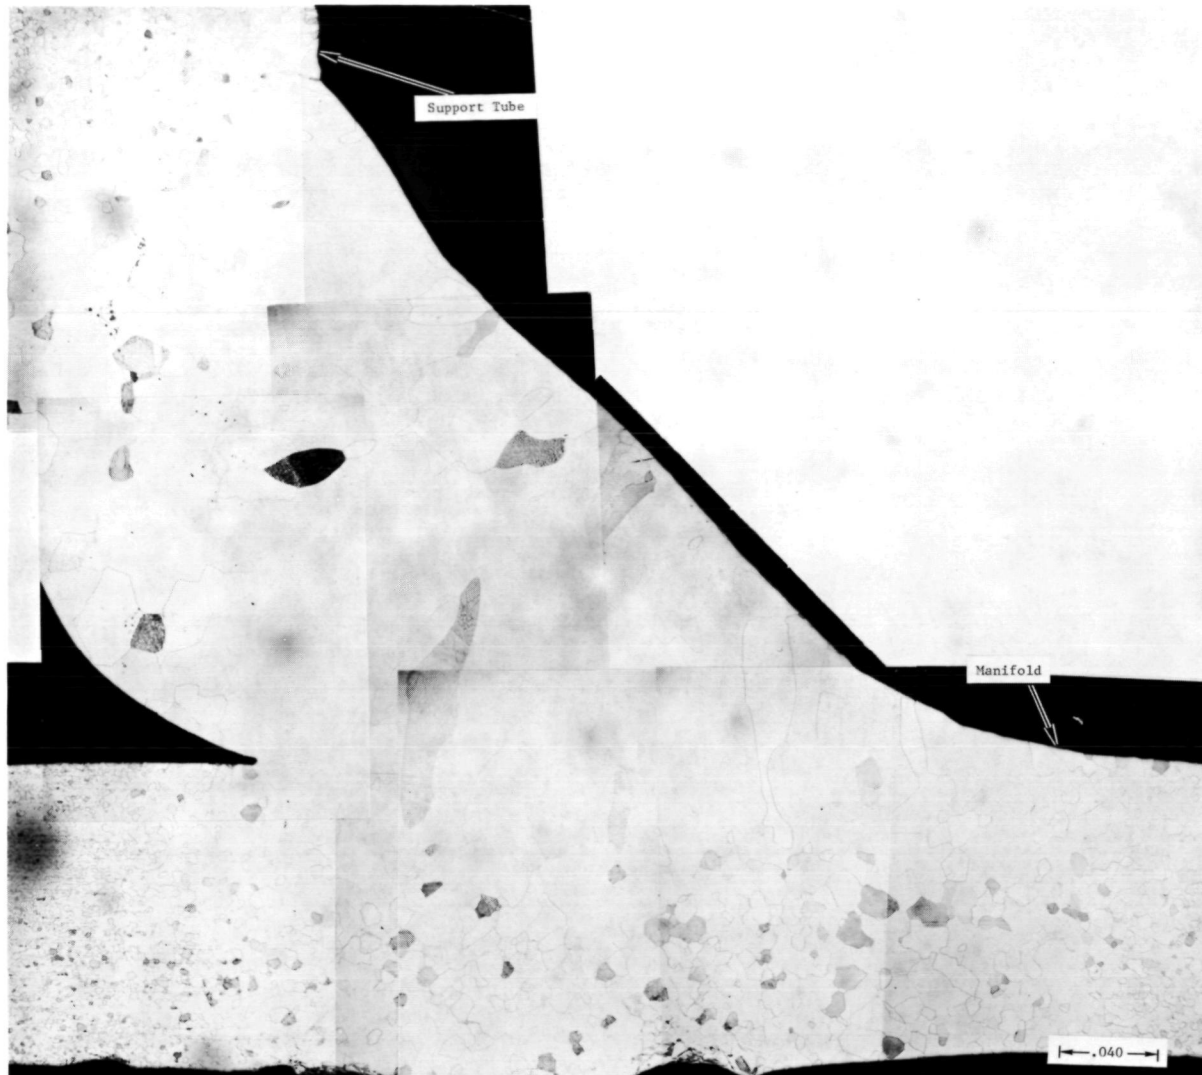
Transverse Section of Weld. (MB 779)
